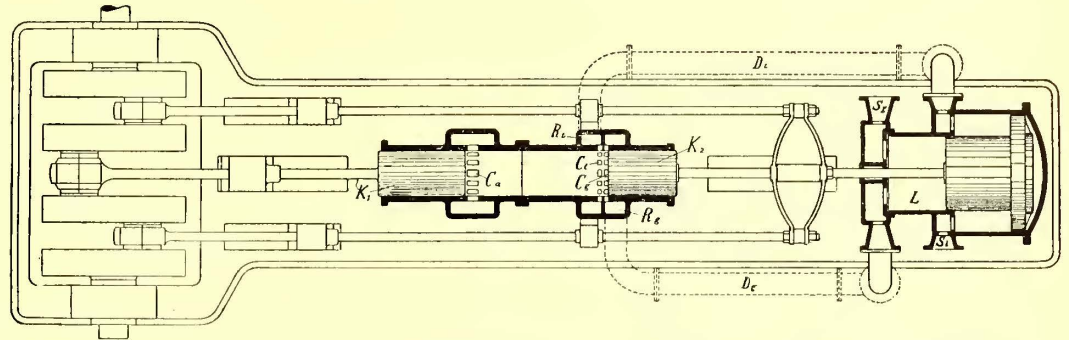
SEMI-SECTIONAL PLAN VIEW, SHOWING PISTONS WORKING IN OPPOSITE DIRECTIONS
